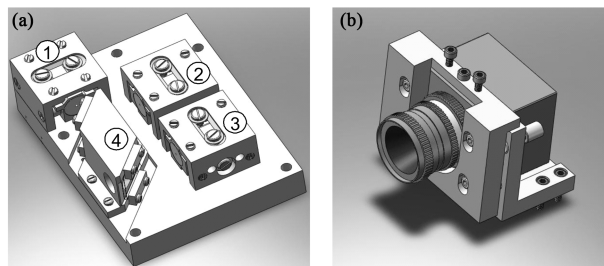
(a) Laser module with ① 635nm, ② 670nm, ③ 785nm lasers and ④ holder for two laser beam combiners; (b) Image sensor employing a linear optical sensor array
